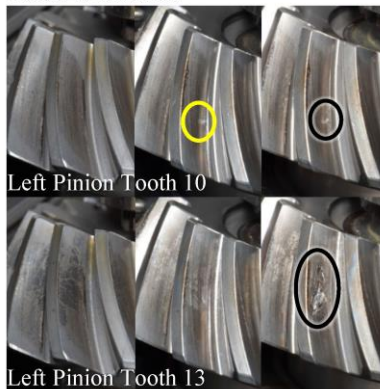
Tests L4545R5050 Tooth Damage Photographs for Left Pinion.
